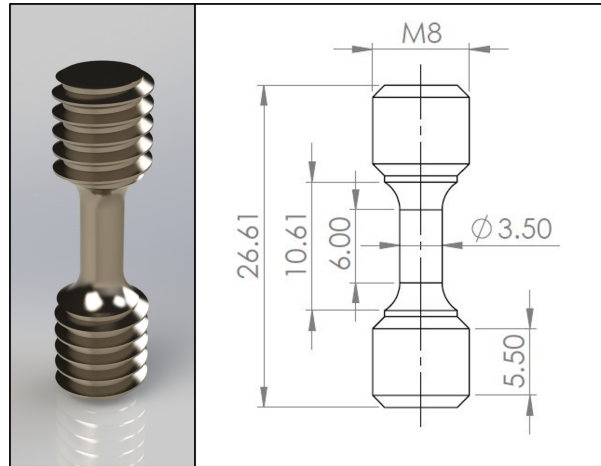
3D model and drawing of the tensile test specimen. All dimensions are in mm.
